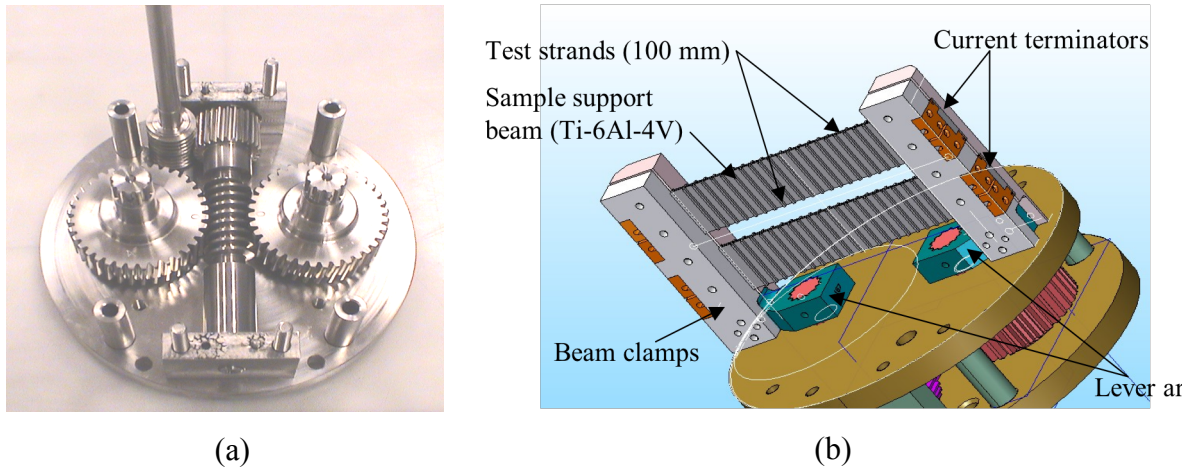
Pure-bending device. (a) Gear assembly. (b) Two sample holder beams mounted on the gear box. Each bending beam has two test strands on the upper and lower edges.
